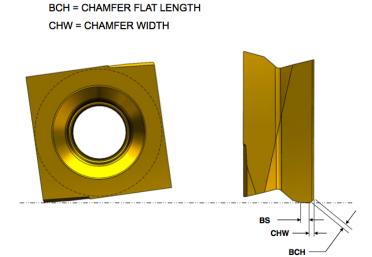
Cutting Tool Measurement Diagram 6 (Cutting Item – ISO 13399)
